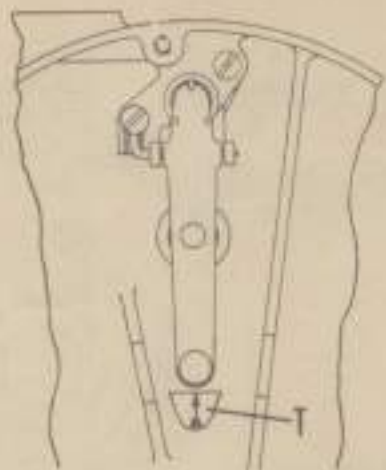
Location of post or boss with stamped arrow for the purpose of setting the fuel inlet valve lever.
